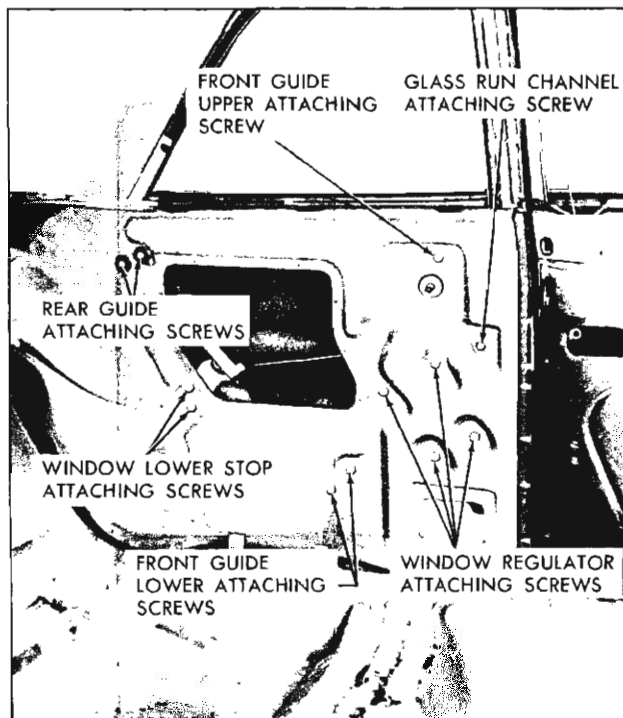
Rear Quarter Hardware Attachment—1611 Styles—Electric
